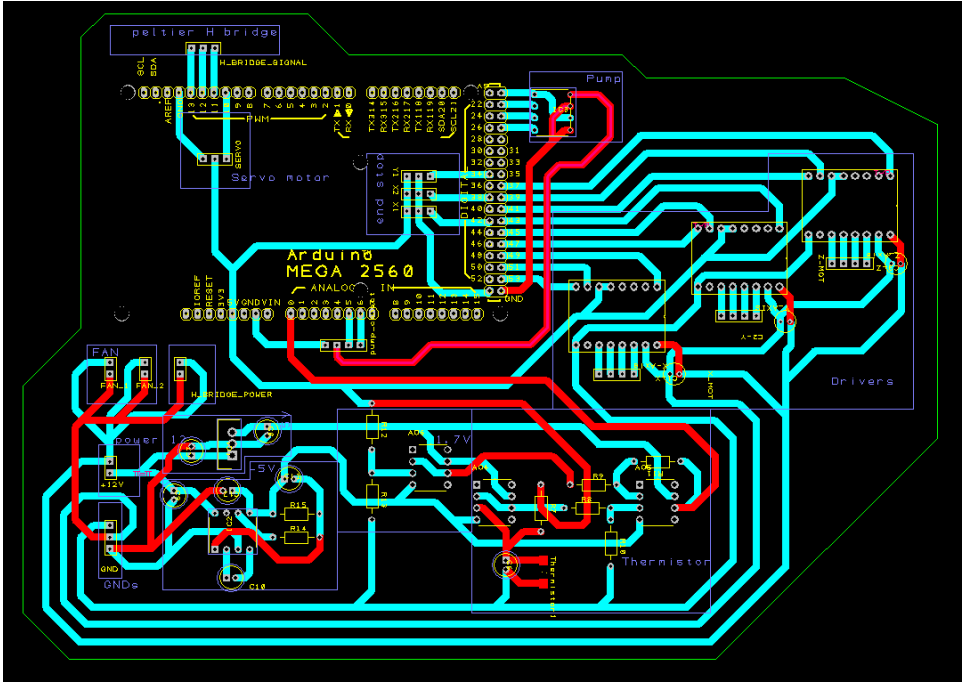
TOP AND BOTTOM PCB LAYERS
